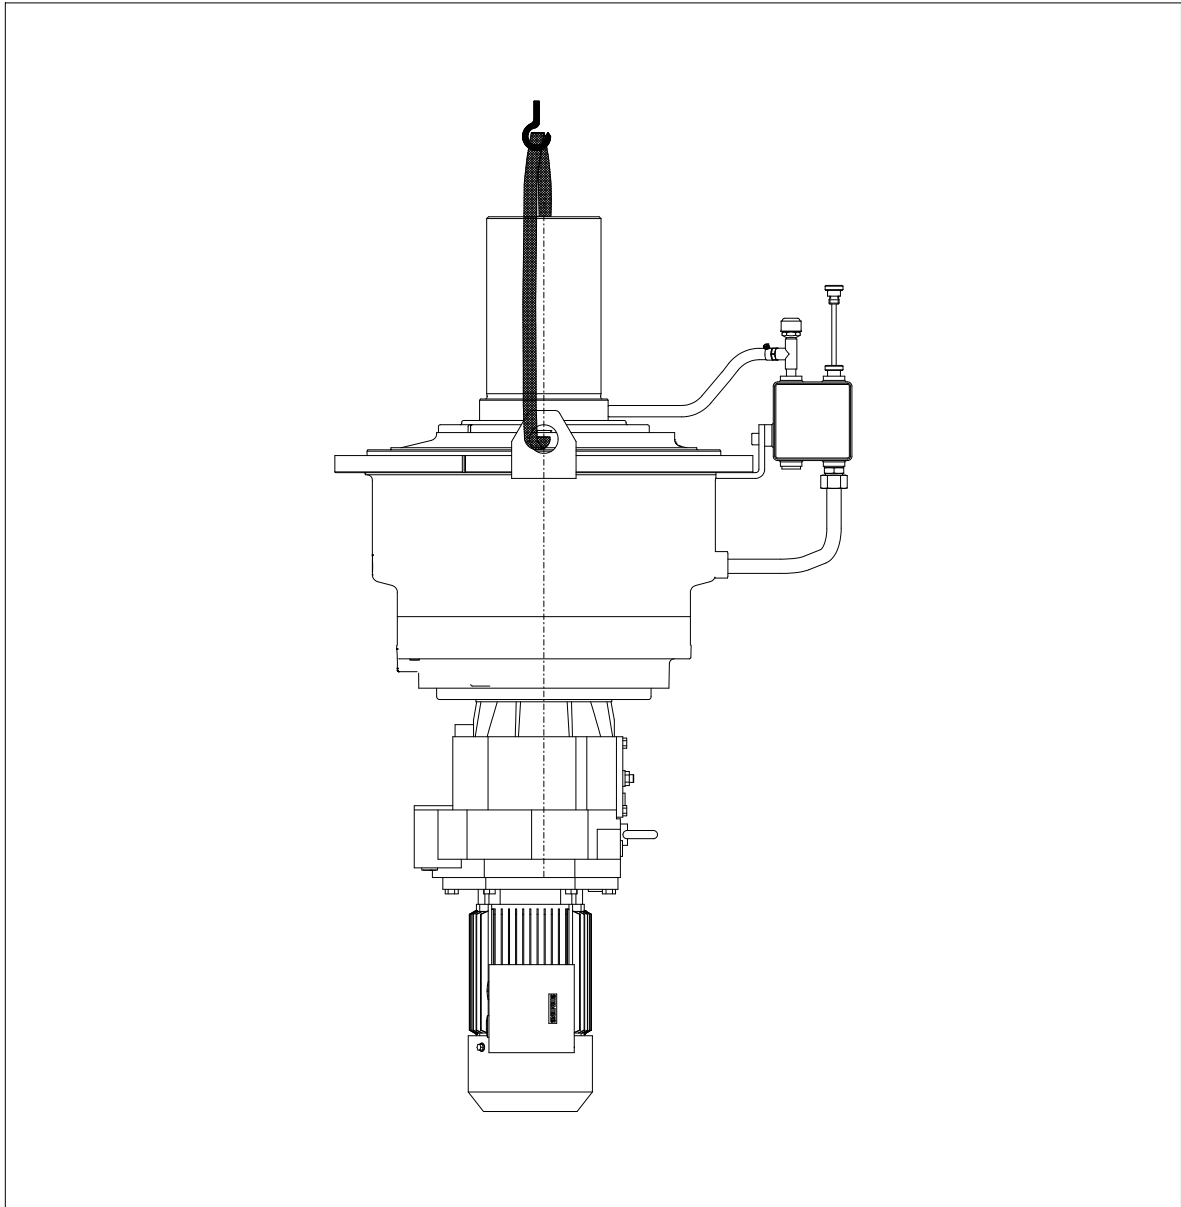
Attachment points on gear units of type O2C ("LSS" top) <sup>1)</sup>
